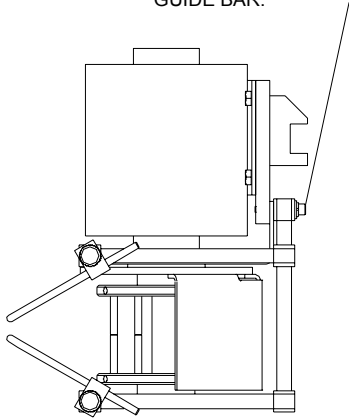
Pneumatic Tab Trimmer Product Guide Adjustment
